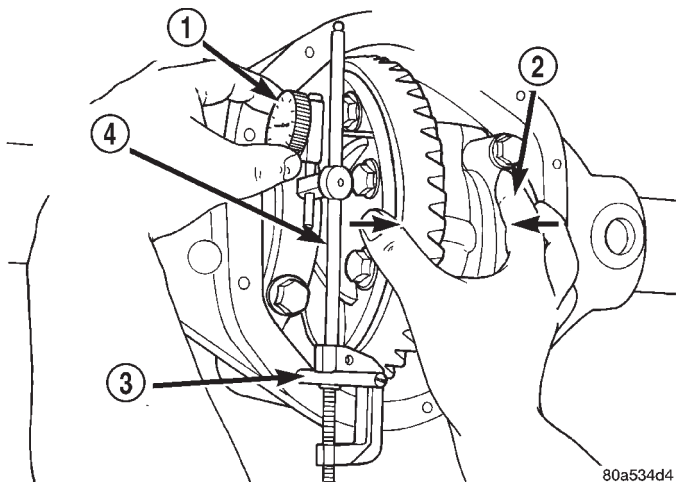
Seat Ring Gear Side Differential Dummy Bearing
